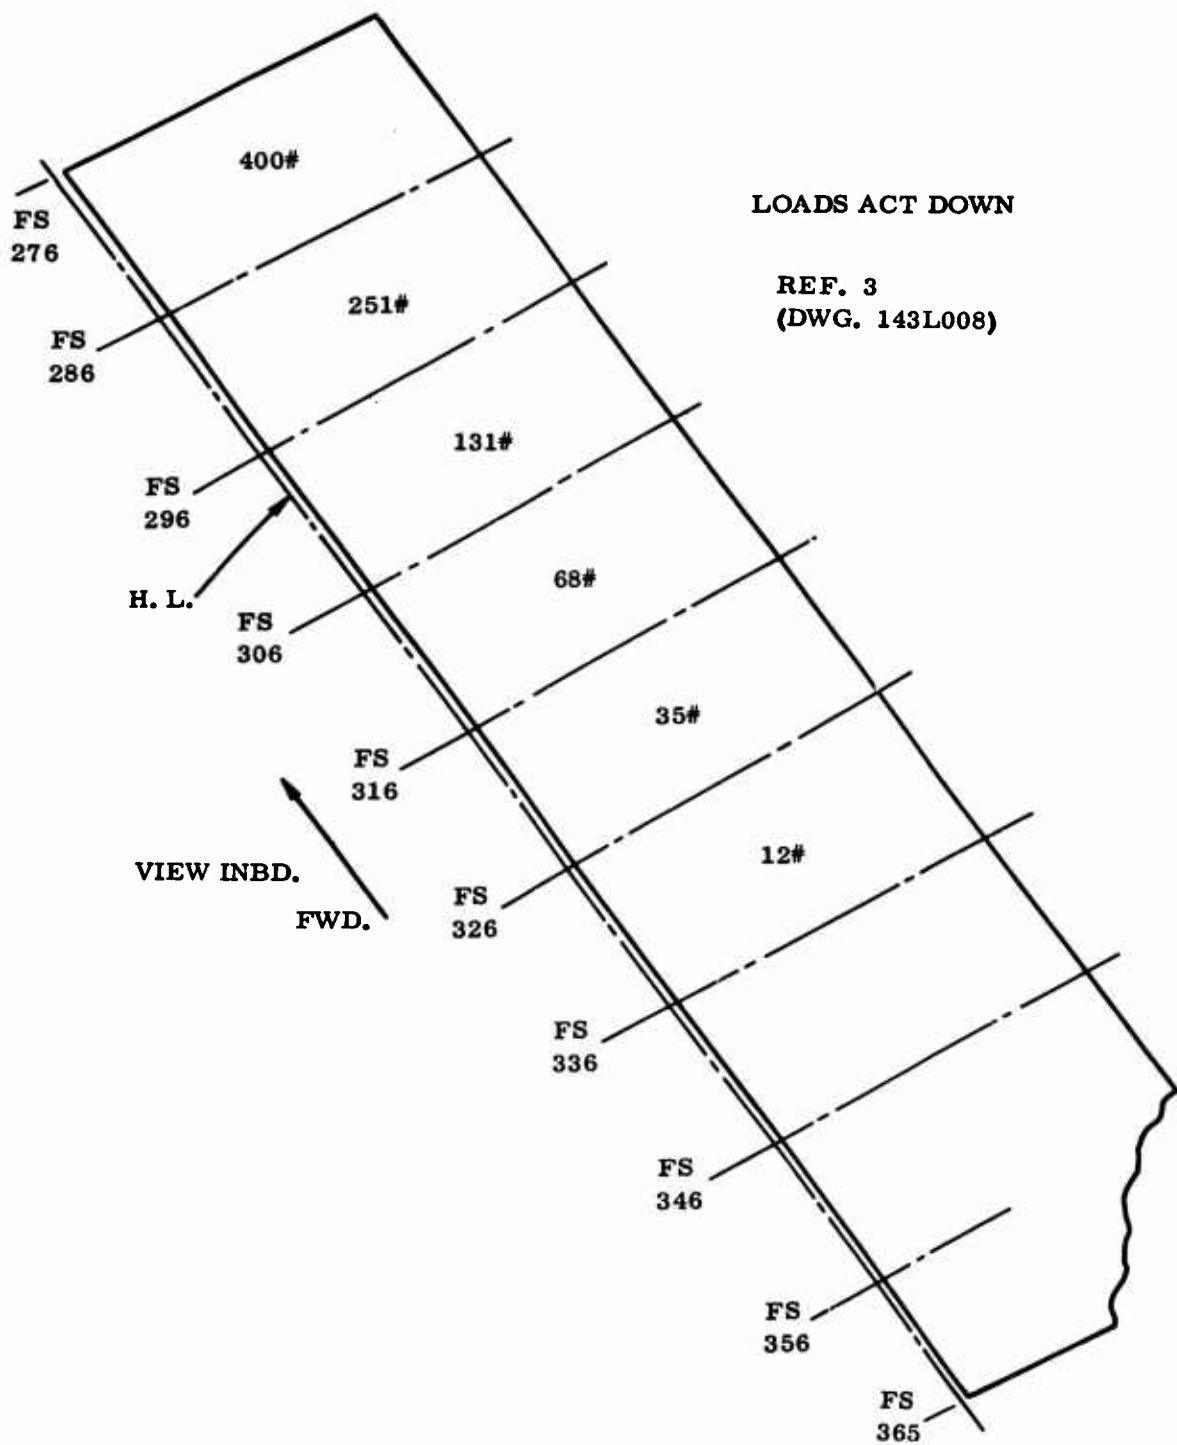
Main Landing Gear Door - Inner Panel, Limit Test Loads
